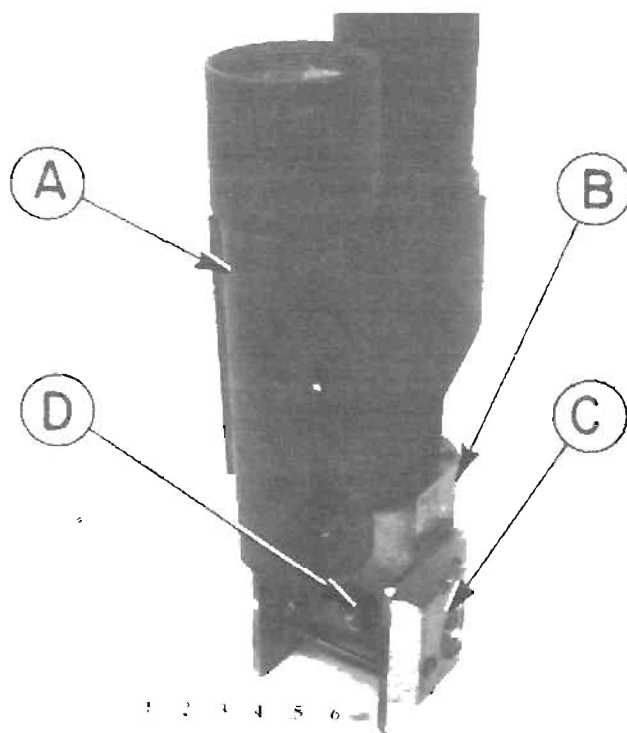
Nozzle components. A, Carrier assembly; B, nozzle body; C, barrel attachment plates; and D, nozzle.
